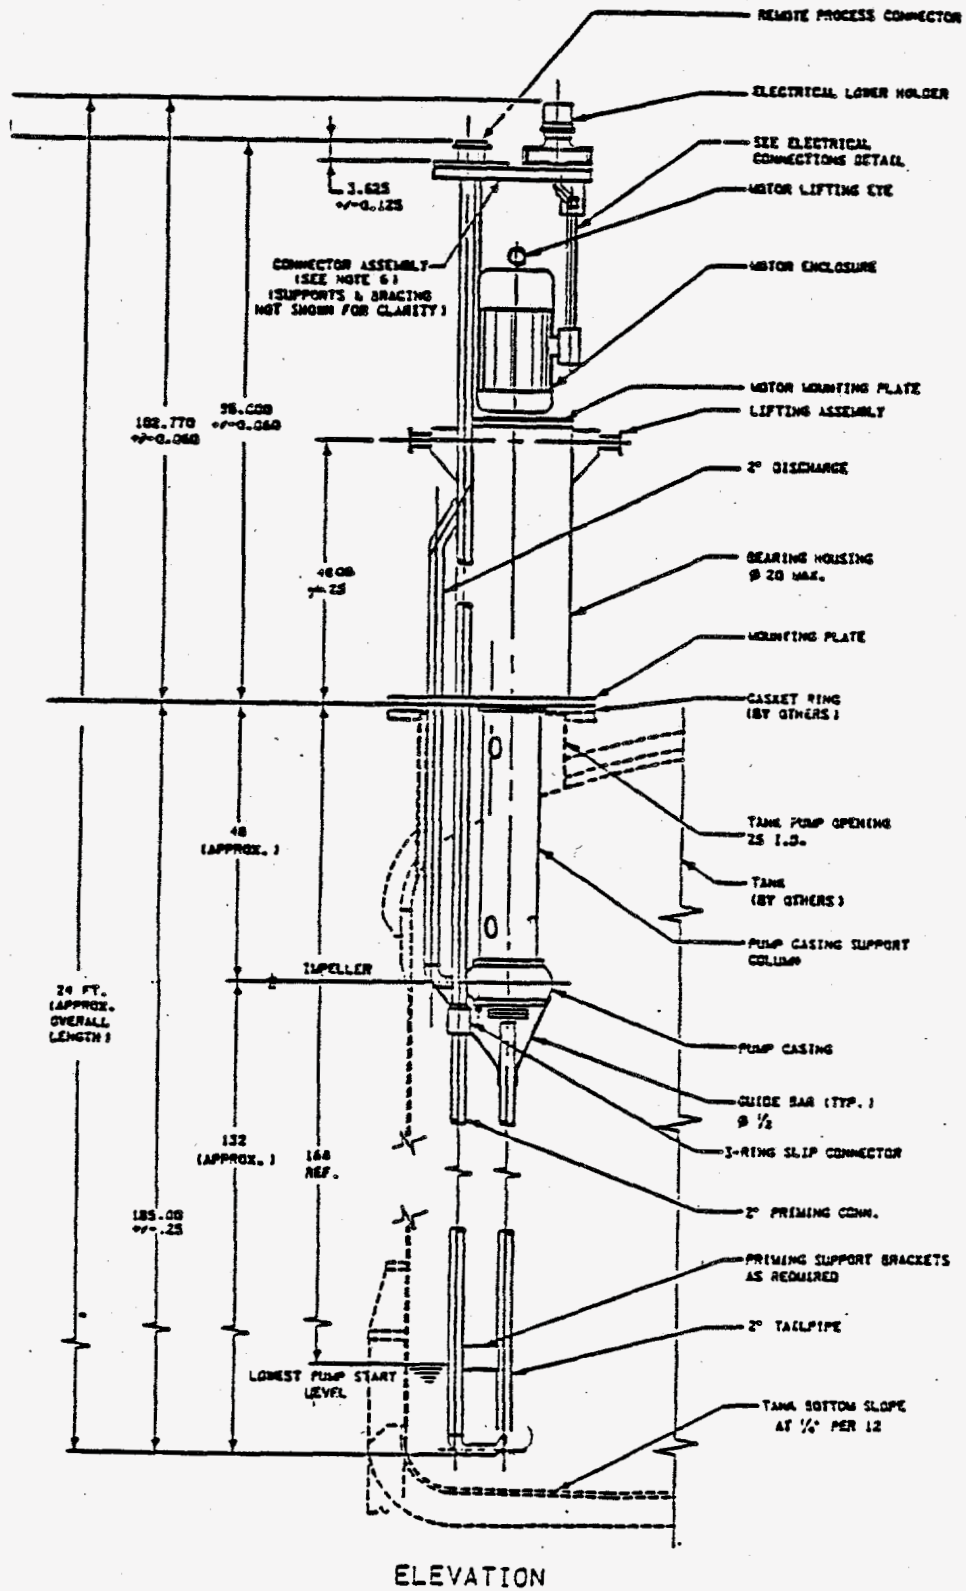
DWP VCC Pump Drawing (DWP drawing W752260, rev 3)
